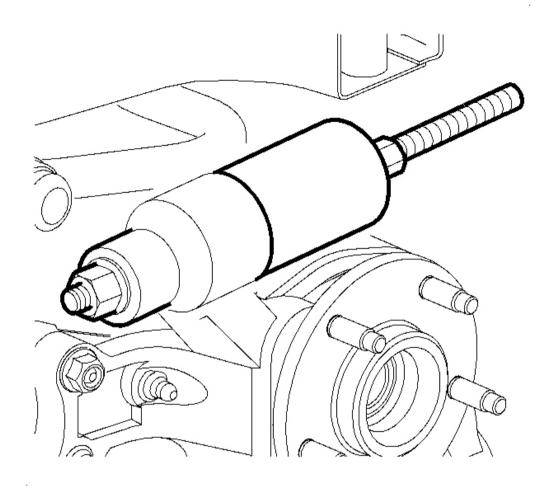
Upper Control Arm Bushing & Knuckle Assembly Courtesy of GENERAL MOTORS CORP.
